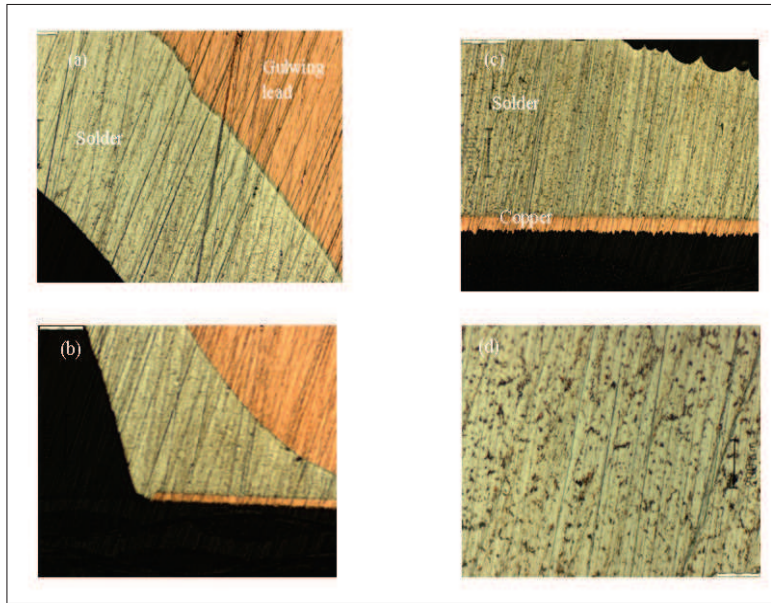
Solder's (SnPb) microstructure using optical microscopy, (a) Upper half of solder under gull wing lead, (b) Lower half of solder under gull wing lead, (c) Solder in front of the gull wing lead, (d) Microstructure of the SnPb solder under gull wing lead.
